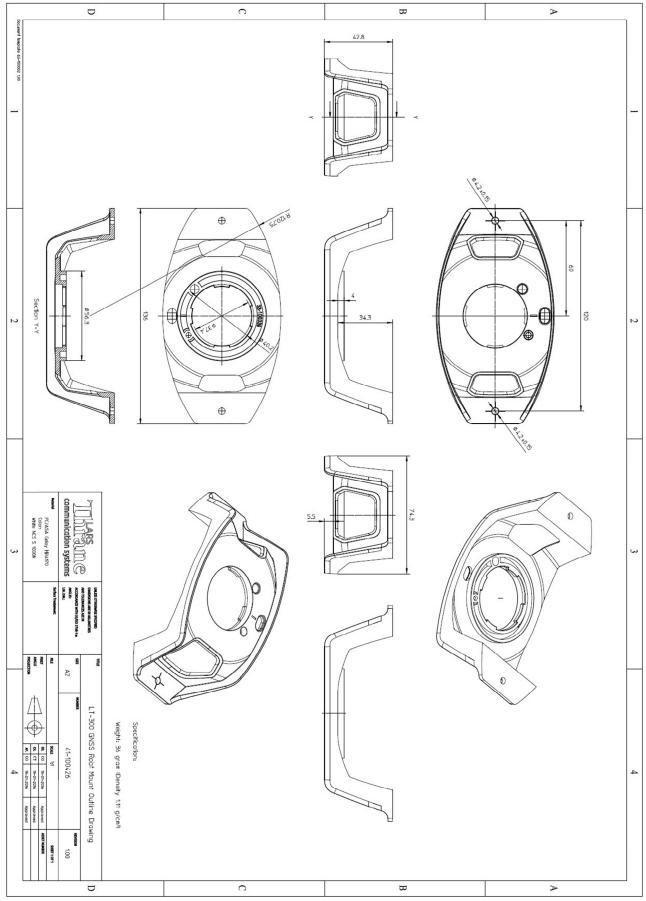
LT-300 GNSS RECEIVER OUTLINE DRAWING (ROOF MOUNT)
